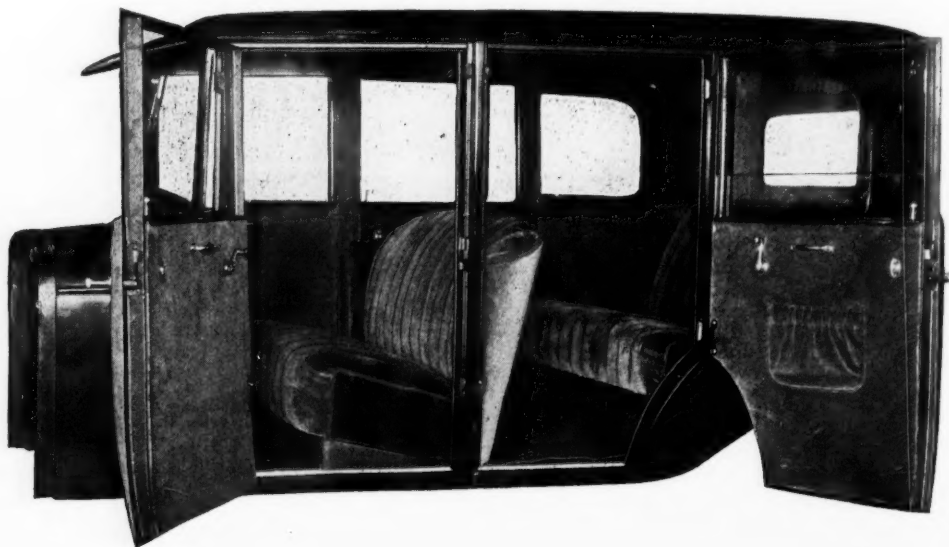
Completely trimmed body before shipment. Front boards are installed after assembly with chassis
